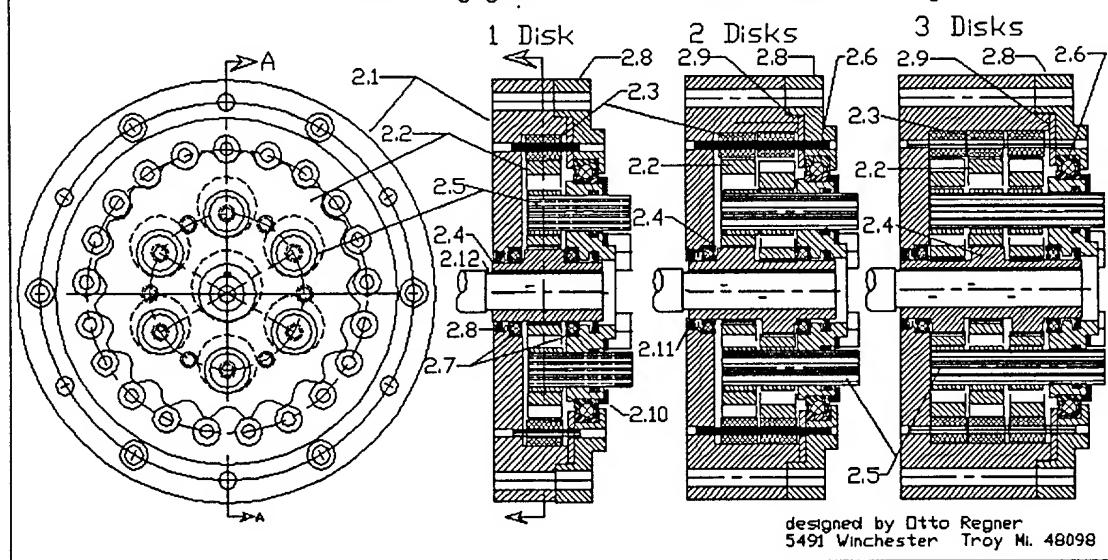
Precision Cyclo Gear System with Three Camshafts, Three Wave Disks, Three Planet Gears, Three Connecting Torque Rods and One Sun Gear, and Hollow Center.
